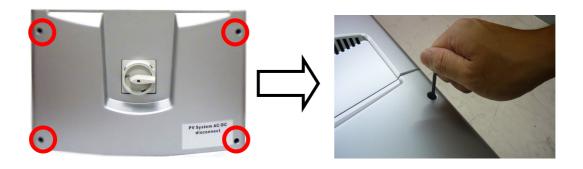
Remove the screws of DC/AC Wiring Box
